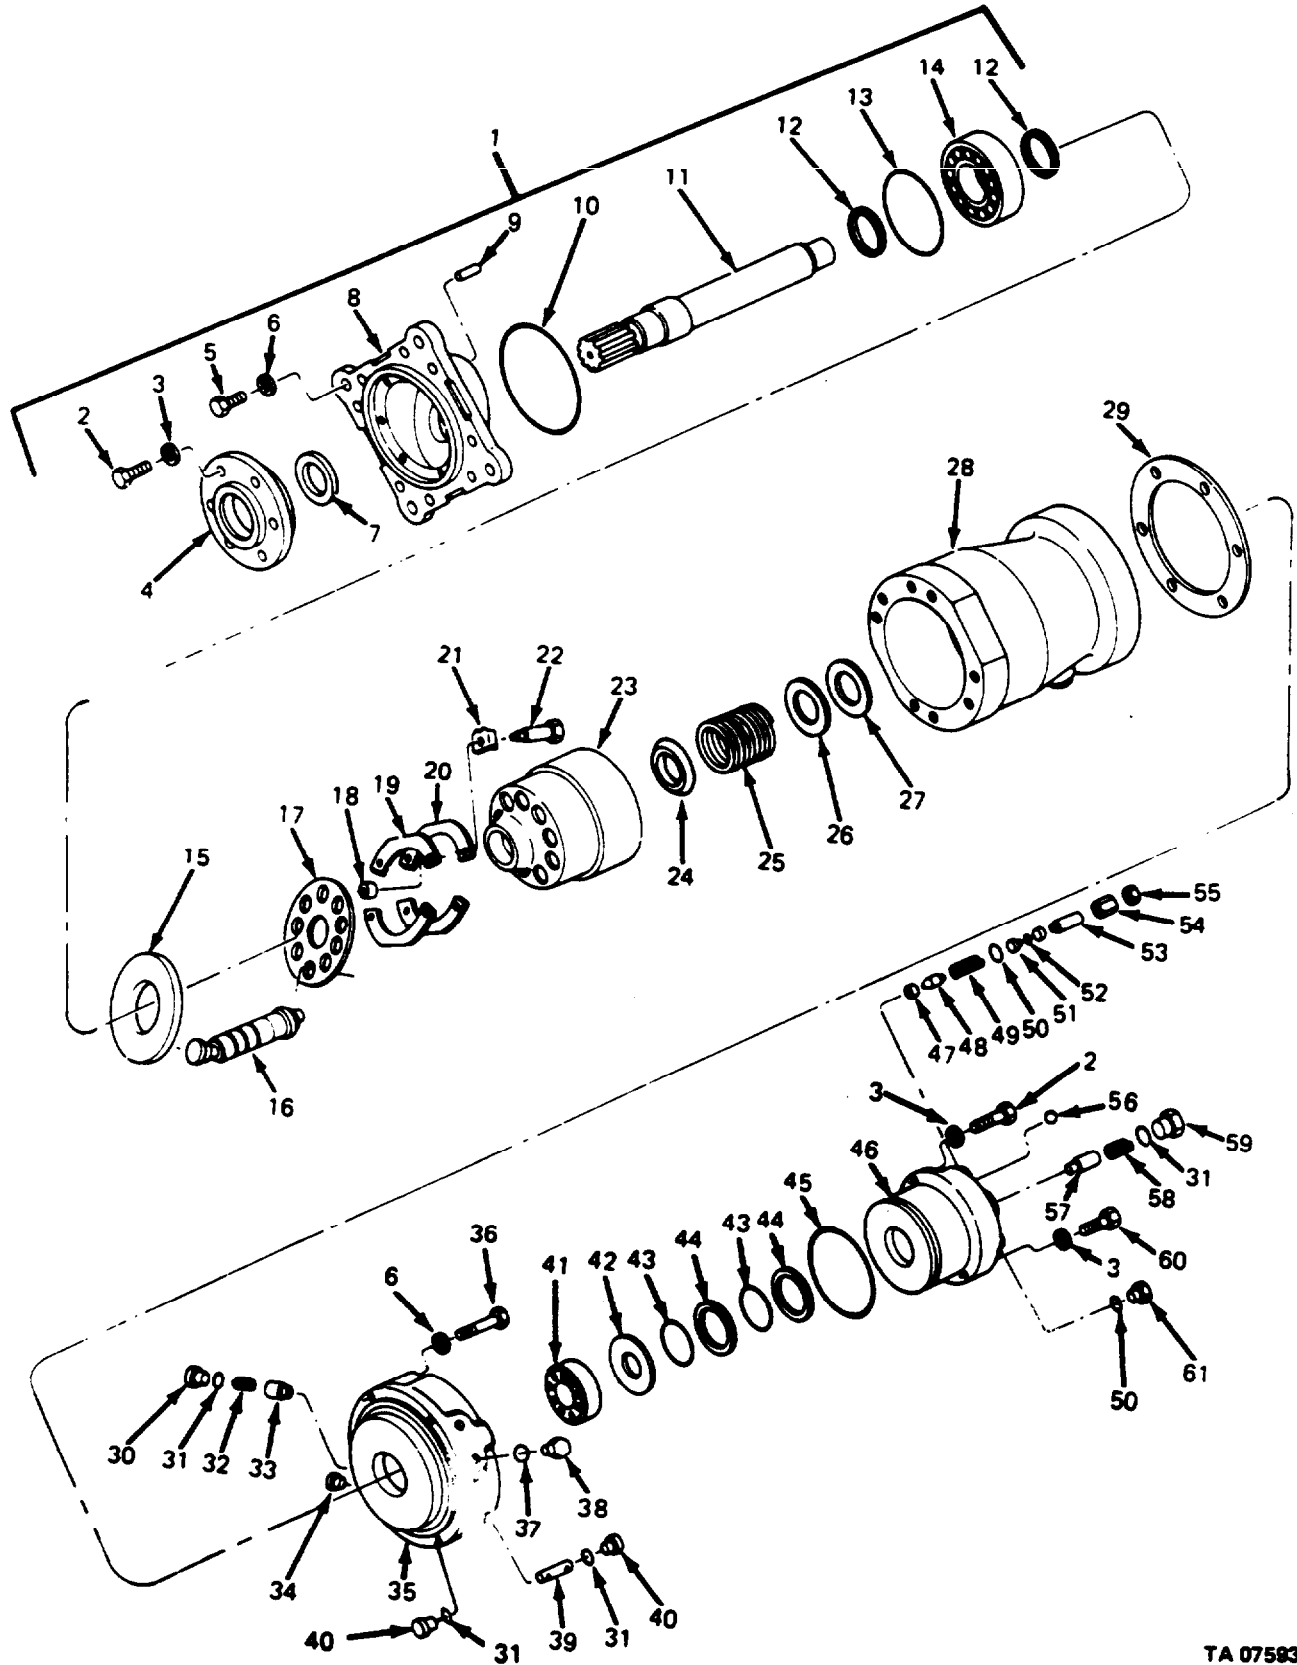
Motor - Hydraulic (Sheet 1 of 2).
